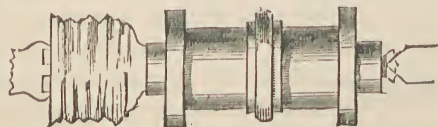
STEAM CYLINDER IN POSITION FOR TURNING.
